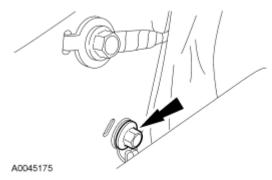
Ground Wire Bolt Courtesy of FORD MOTOR CO.
